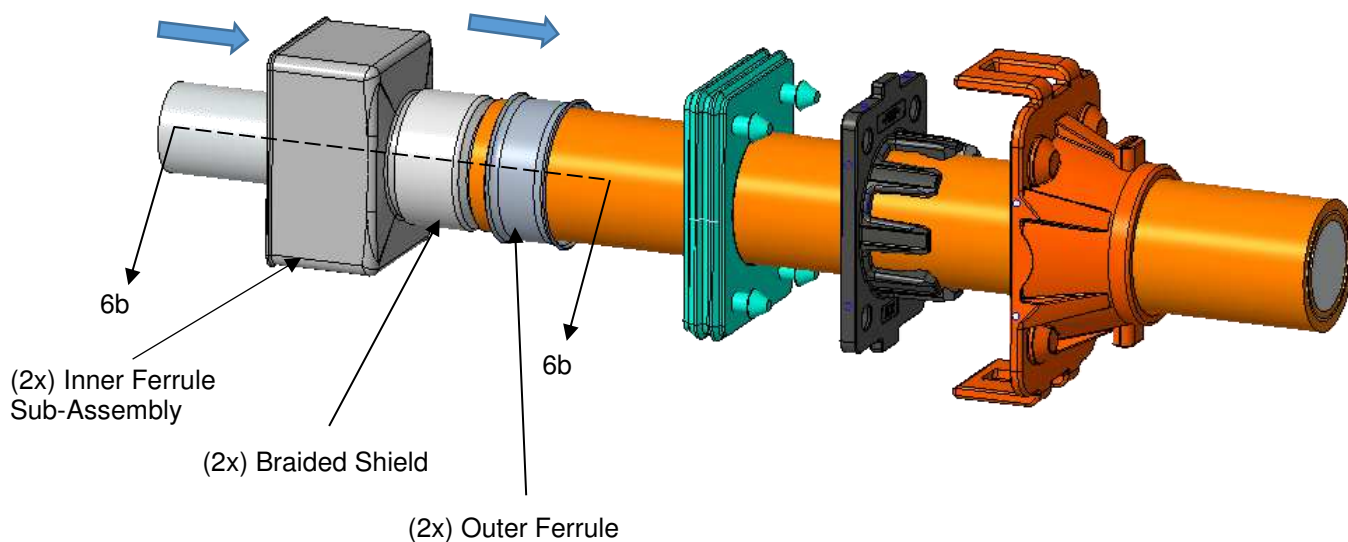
Slide the outer ferrule over the outer cable jacket.
